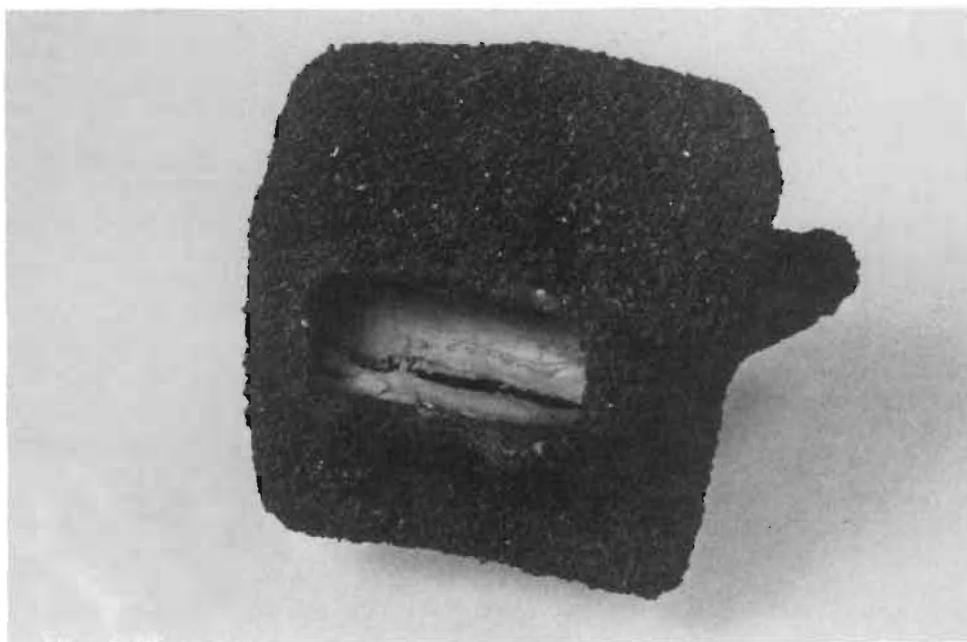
Three-Blade Section Carbon Mold Filled with Silicon Carbide Slip.
